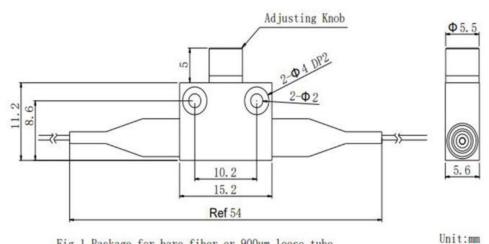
Package for bare fiber or 900um loose tube. The Color of Tube is Red.
